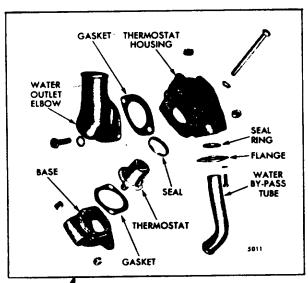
Thermostat Housing Details and Relative Location of Parts (V-Type Engine)
